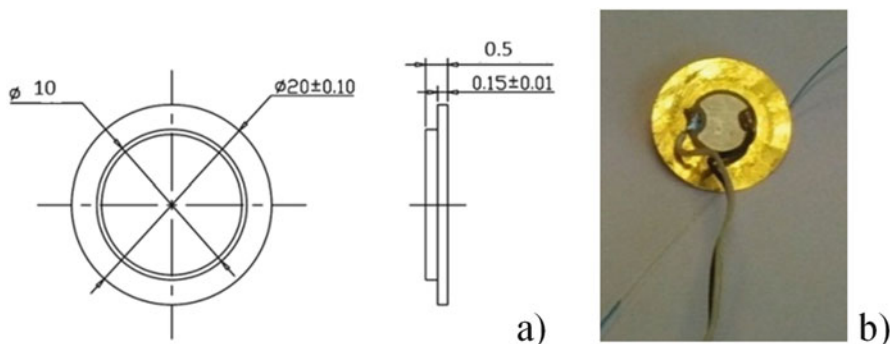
Piezoelectric diaphragm with bonded actuator Sonox P502: (a) dimensions of the components, (b) real element
